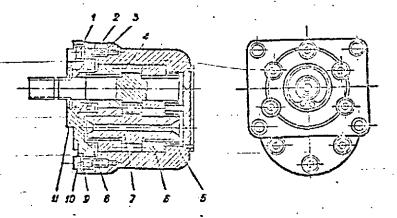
, HYDRAULIC BOOSTER PUMP HIE 46
